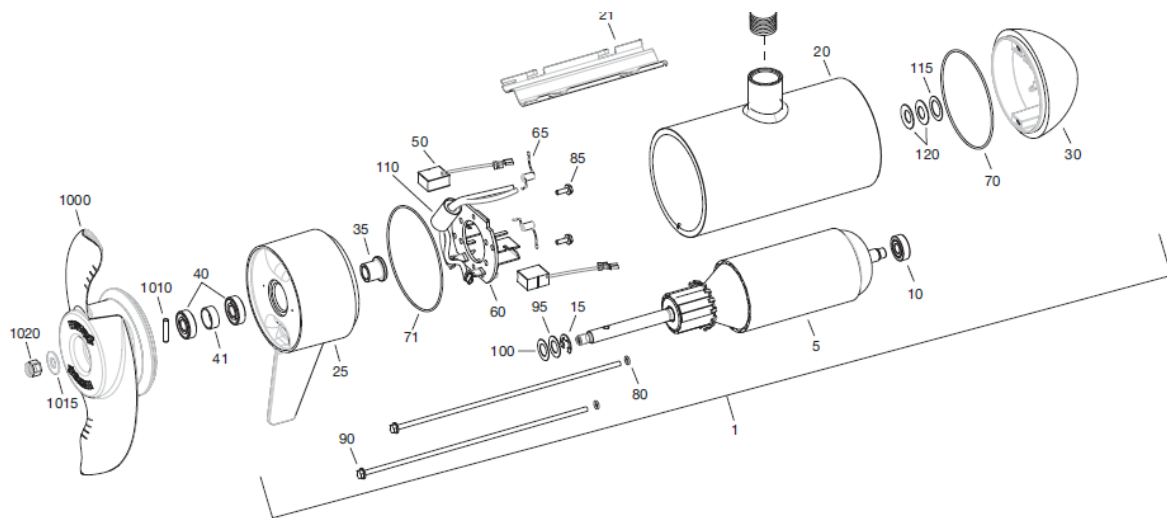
Minn Kota Riptide 112 lb trolling motor (exploded view) [9]
